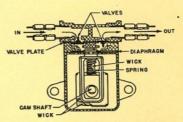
HEATER FUEL PUMP -SECTIONAL VIEW
